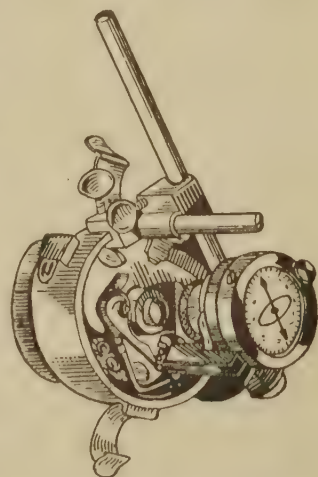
Dial Method of Setting Contact-breaker Opening.
